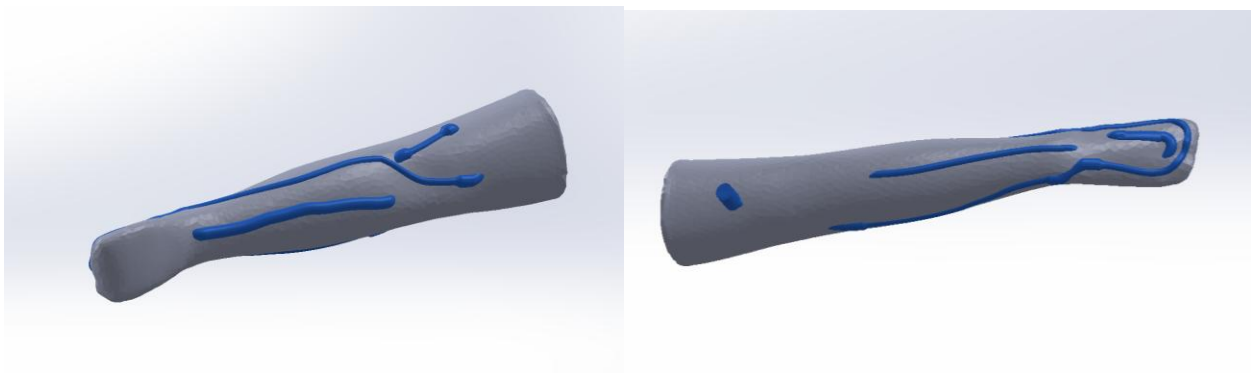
Vein channels with surface of core: (a) angled view and (b) side view.
